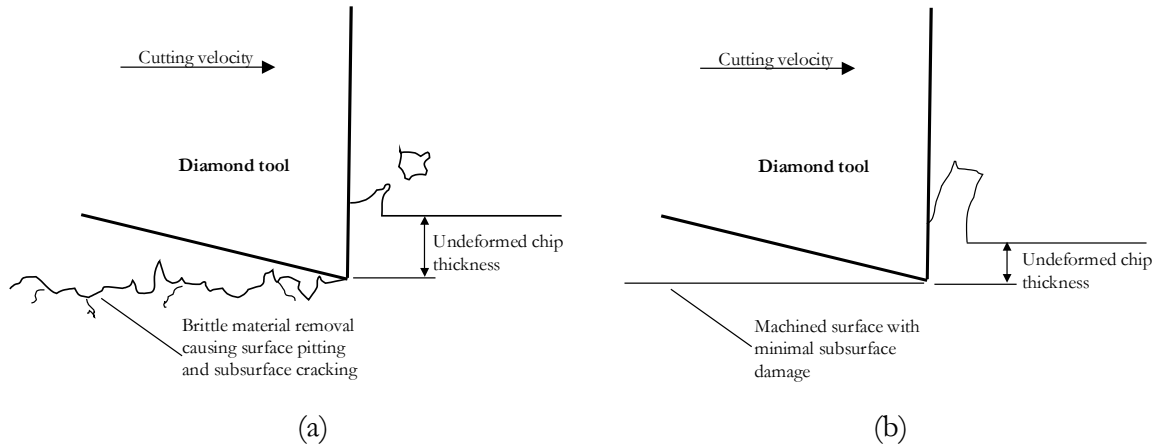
Orthogonal machining illustration of the two material removal regimes; (a) brittle material removal and (b) ductile material removal. In brittle material removal, the undeformed chip thickness is above the material threshold, thus fracture damage is left in the wake of the tool. In ductile material removal, the undeformed chip thickness remains below the critical limit.
